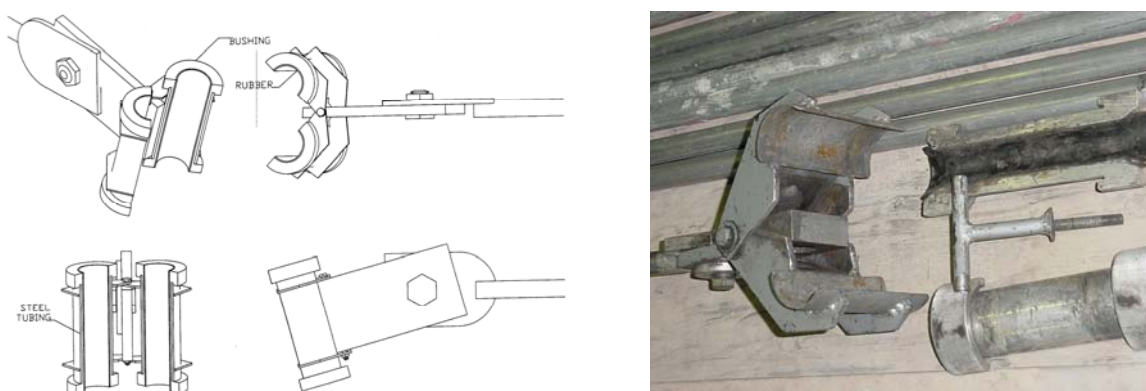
Schematic of the clamping mechanism used on the Mark II prototype (left); photograph the actual mechanism (right). The mechanism was lined with rubber to minimize bark damage on the shrubs.
